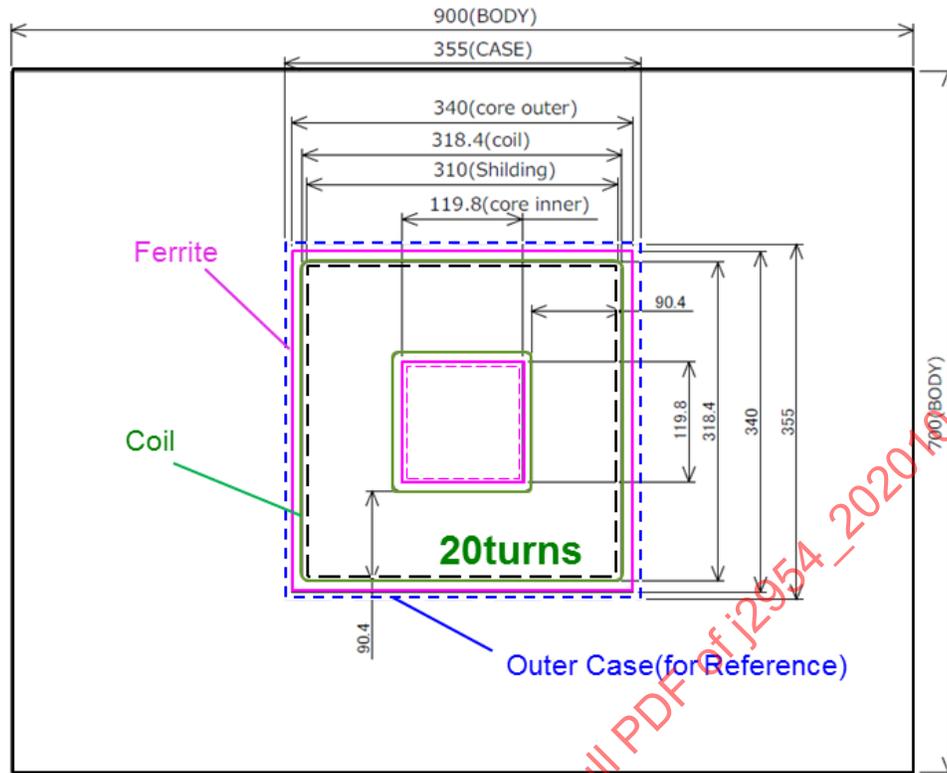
Mechanical dimensions of the Test Station VA WPT1/Z2
